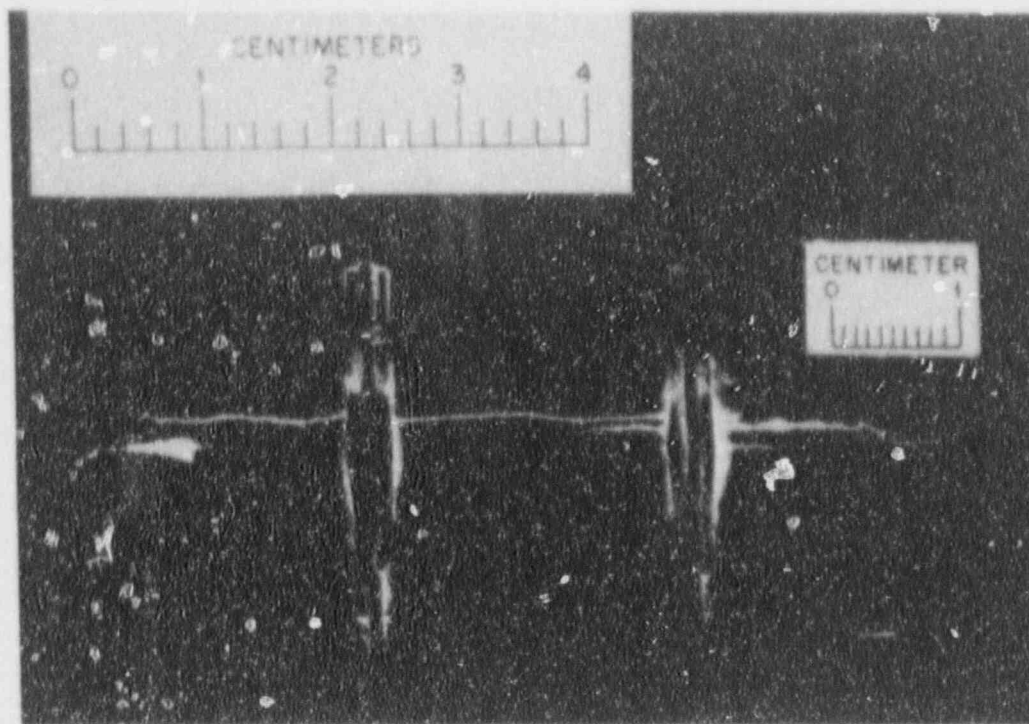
Dye penetrant examination of clad plate CP-15 after the second pop-in failed to reveal any extensions of the flaw on the surface beyond those observed visually.
